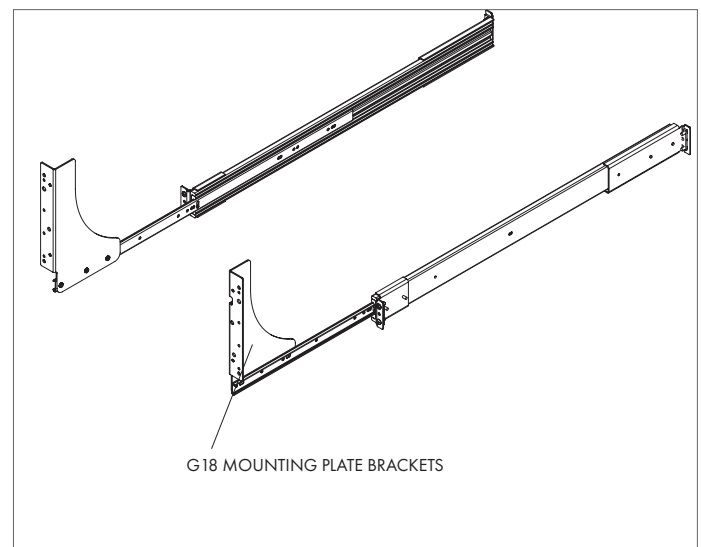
Figure B. The platform mounting brackets are threaded so washers and nuts will not need to be locked.
